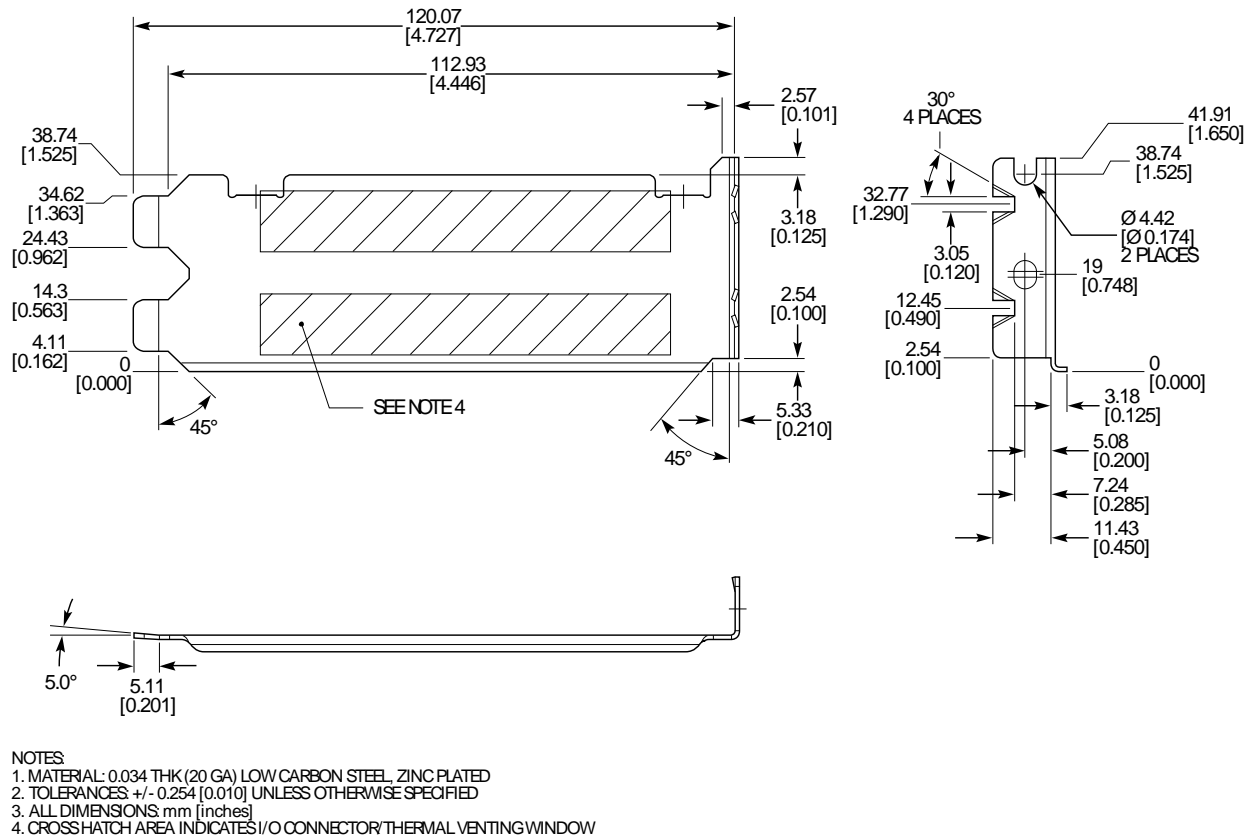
PCI Express TRIPLE-SLOT Add-in Card Dimensional Drawing
